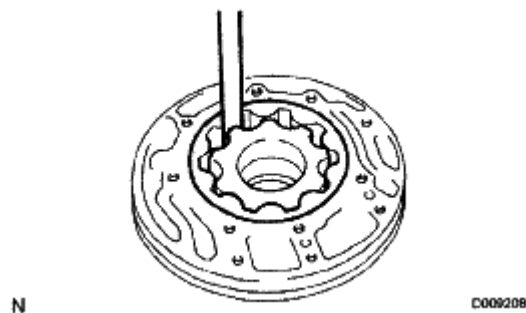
Measuring Tip Clearance Between Driven Gear Teeth And Drive Gear Teeth
